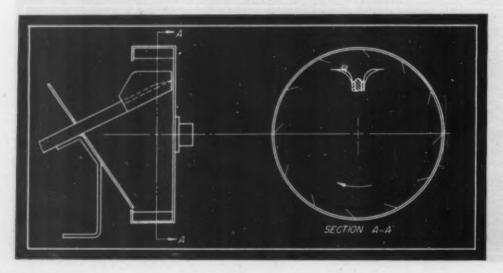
Left Above—Recirculating type hopper design in which a drum with internal buckets deposits parts straddling the exit feeder rail
